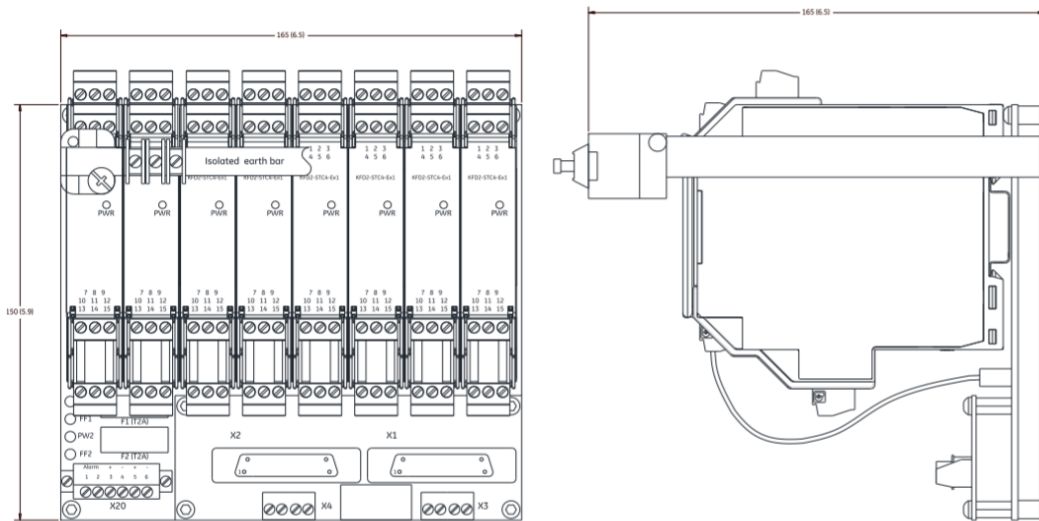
Dimensions of the MTL WP Housing (03639911)
